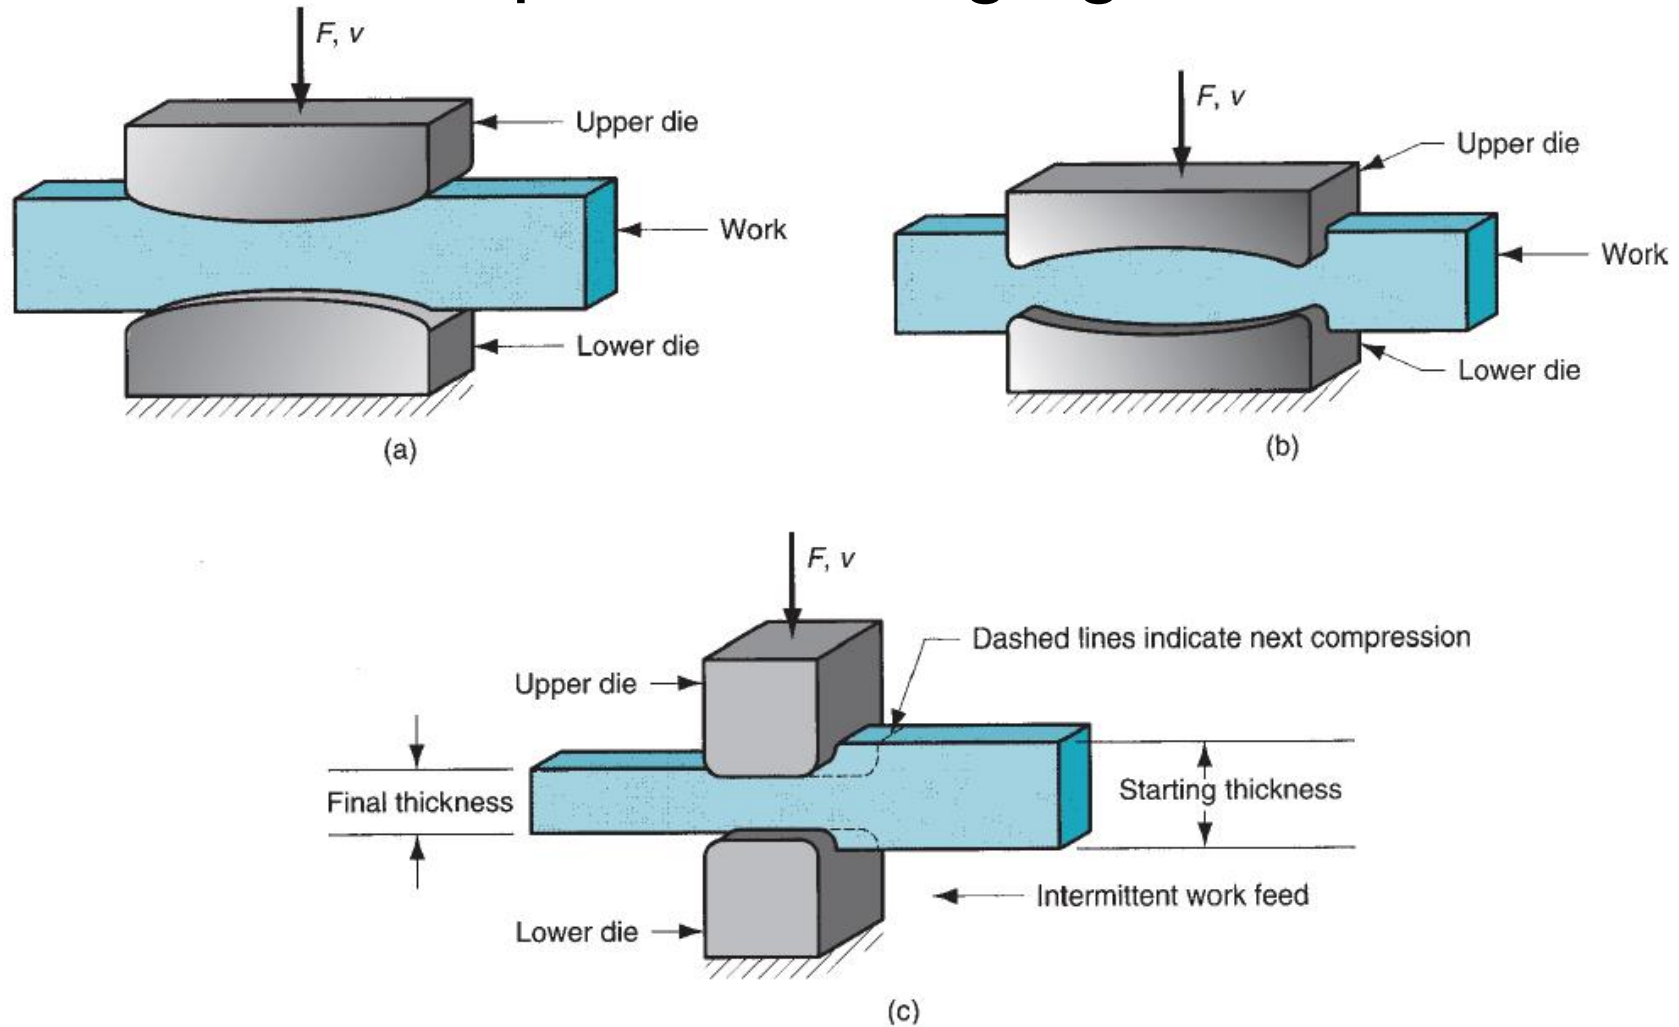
Several open-die forging operations: (a) fullering, (b) edging, and (c) cogging.
